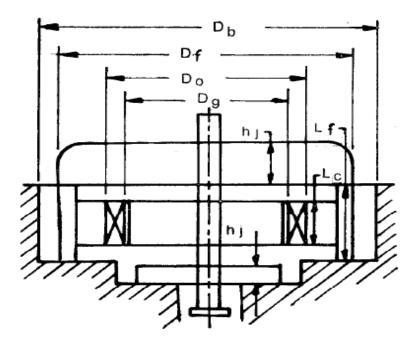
SUSPENDED TYPE CONSTRUCTION
